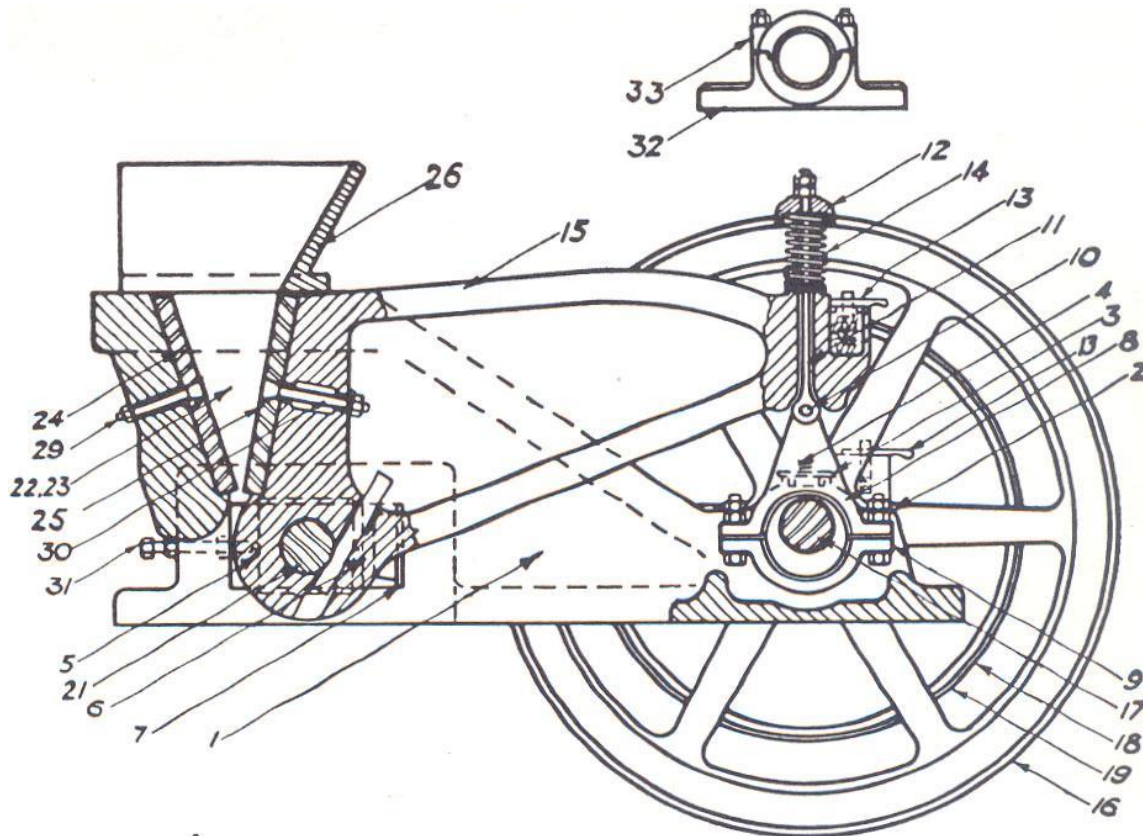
Dodge-type crusher parts: (1) Frame, (2) Main bearing cap, (3) Oil well cover, (4) Oil well cover spring, (5) Swing jaw shaft box, (6) Breaking plate, (7) Shim, (8) Pitman, (9) Pitman cap, (10) Pitman pin, (11) Pitman eye bolt, (12) Pitman jaw spring cap, (13) Swing jaw and Pitman oil well cover, (14) Swing jaw spring, (15) Swing jaw, (16) Flywheel, (17) Eccentric shaft, (18) Loose pulley, (19) Tight pulley, (21) Swing jaw shaft, (22) Left hand side liner, (23) Right hand side liner, (24) Plain stationary jaw plate, (25) Plain swing jaw plate, (26) Hopper, (29) Stationary jaw plate bolt, (30) Swing jaw plate bolt, (31) Dog bolt, (32) Outboard bearing, (33) Outboard bearing cap
